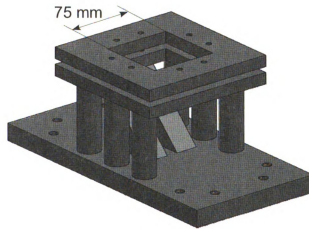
The standard fixture used in the DWIT testing. The specimen was bolted to ensure clamped boundary conditions were obtained.
